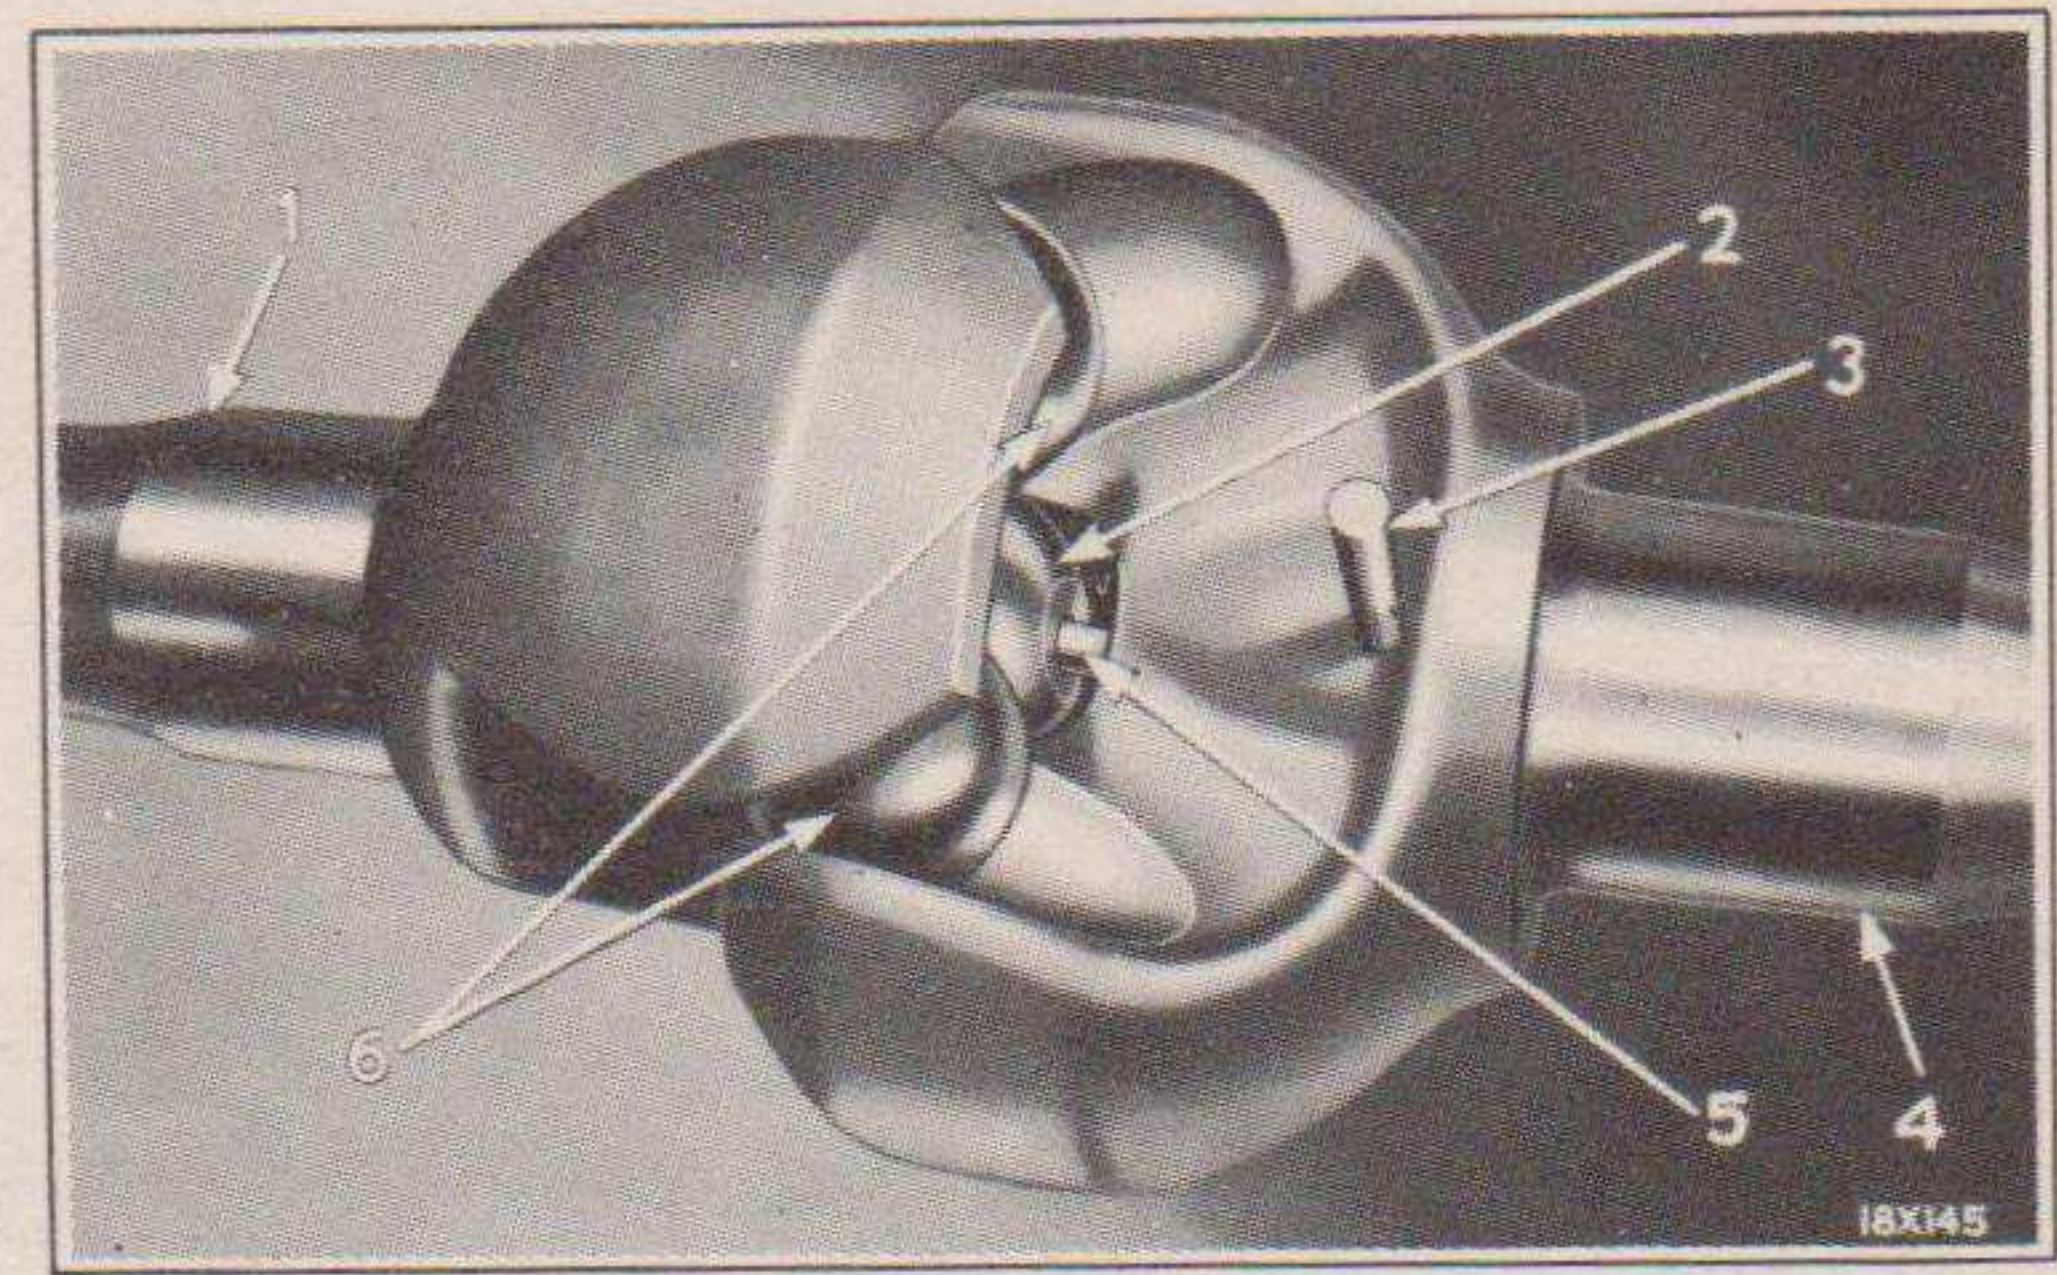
Installing Universal Drive Center Ball Pin Retainer Pin (Bendix-Weiss)
